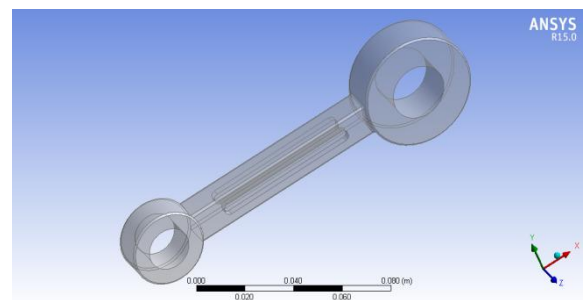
Design Model of Connecting Rod with I Beam
